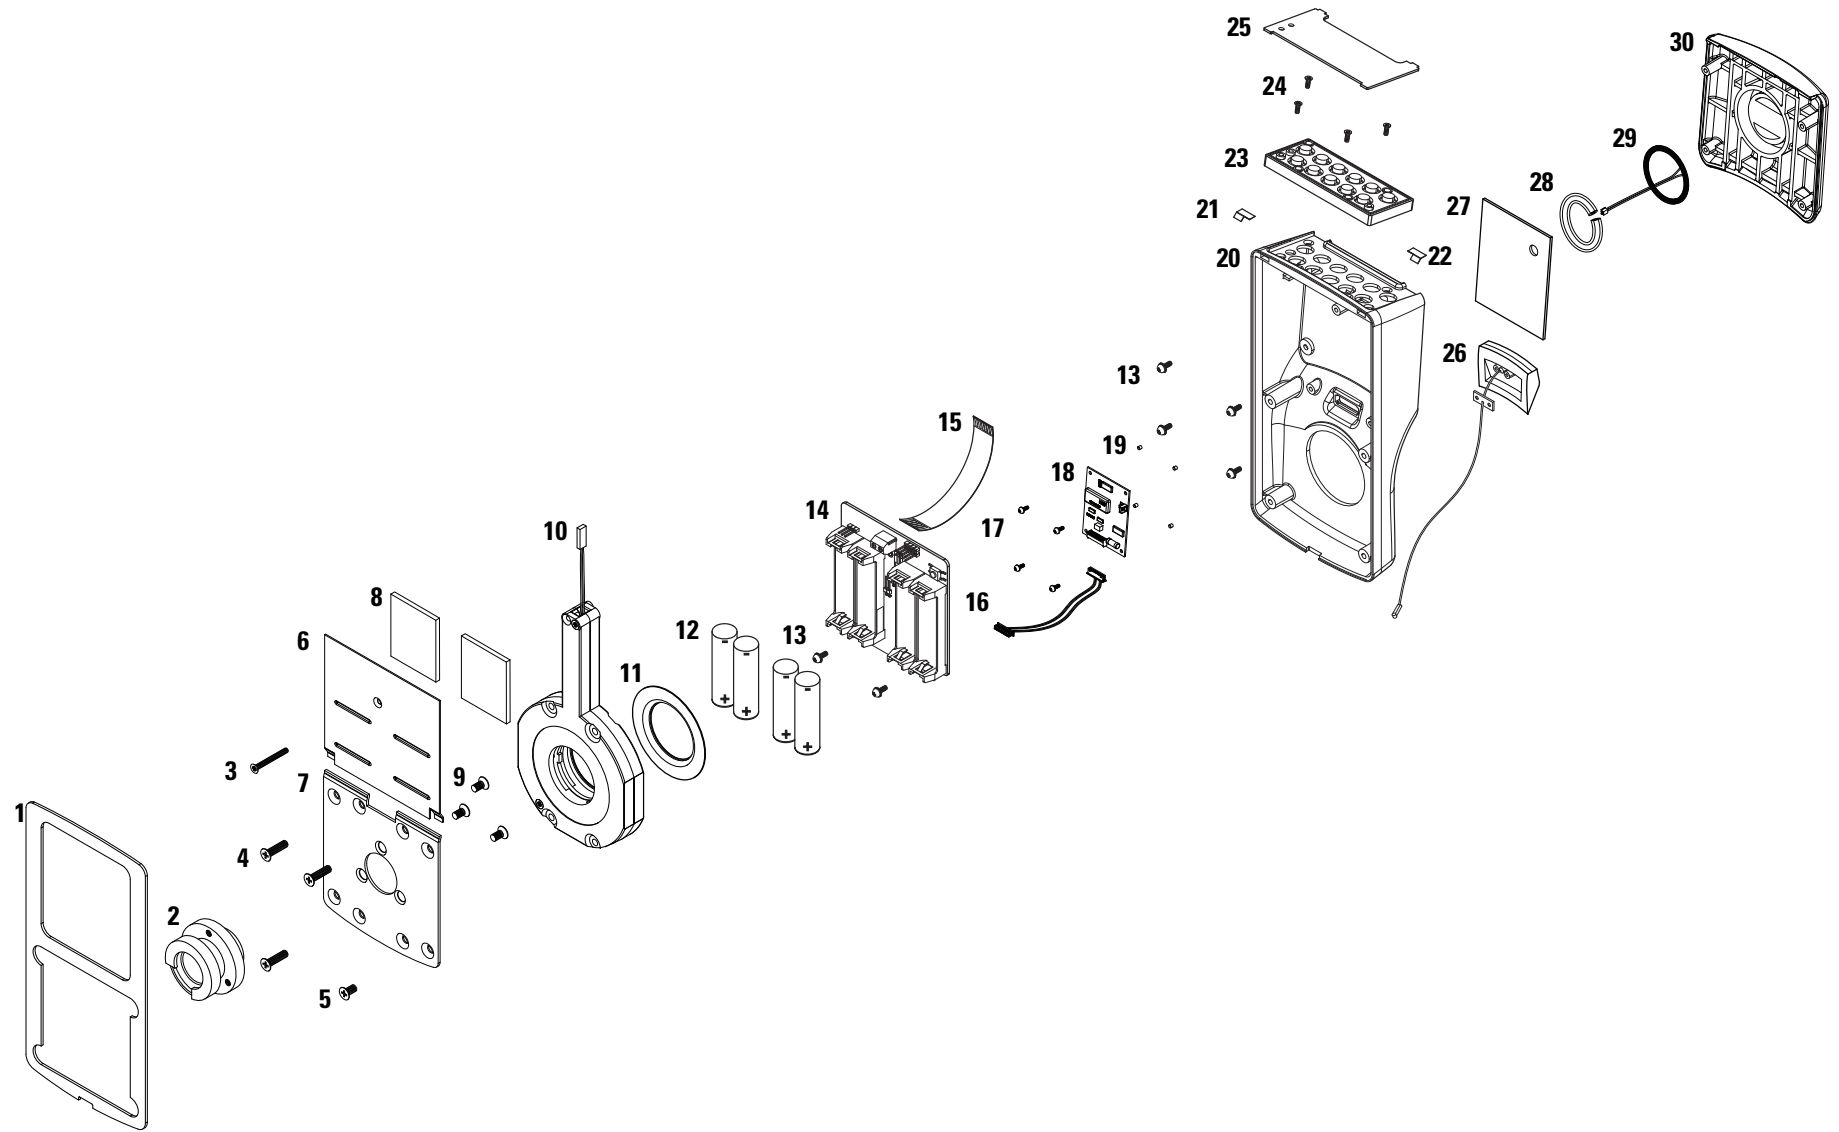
Proximity reader escutcheon assembly (WAMS shown)
